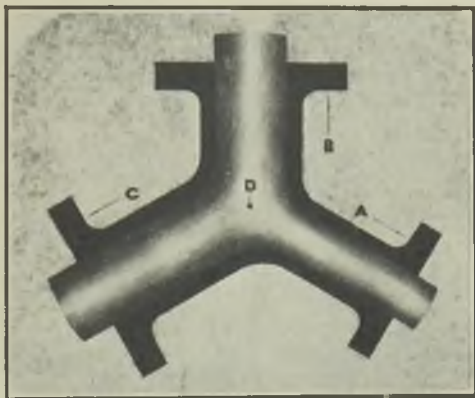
EASING OPERATIONS ON A FLANGED CASTING.
